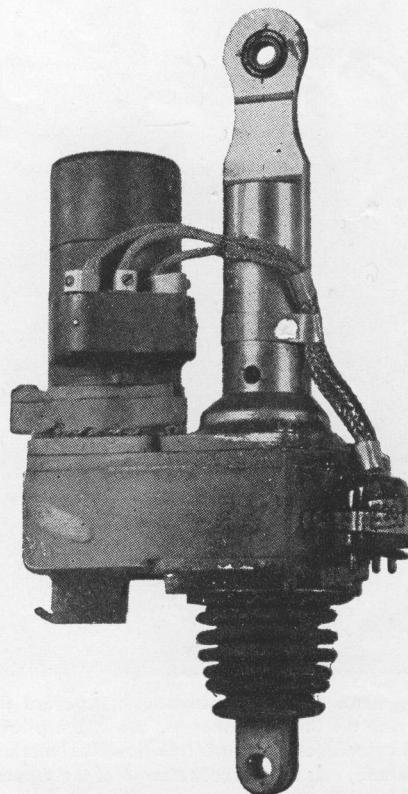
The stabilizer adjusting unit, with ball and socket at the top for attaching to the inside of the fin L.E. and fitting at the bottom for attaching to the stabilizer. The electric motor runs at 14,000 rpm and, through six gear trains with 533-to-1 reduction gear, moves the stabilizer over the full adjustment arc in about 20 sec. A magnetic brake keeps it from overrunning when the current is turned off. A bellows-type rubber sleeve at the bottom of the screw jack keeps it clean.
